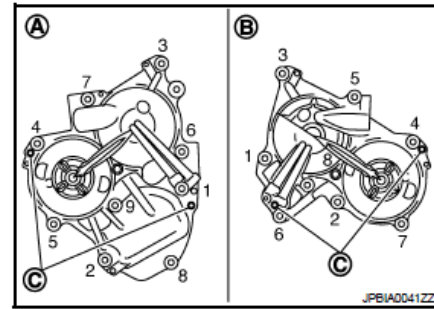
Identifying Mounting Bolts Tightening Sequence
